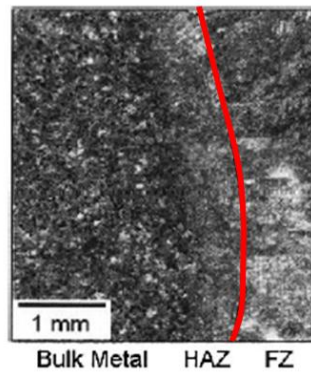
Weld profile for the electron beam welding [129] and L_{surf}
